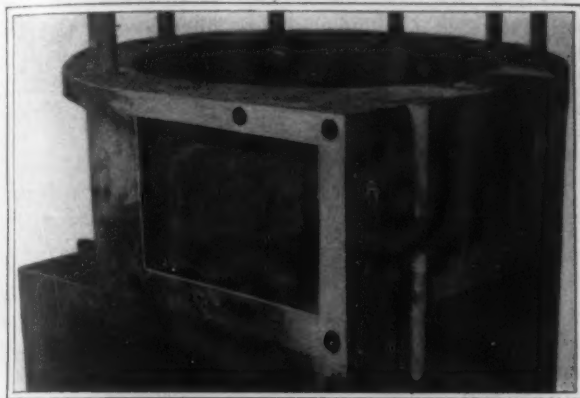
Cylinder Head Repaired by Welding in a New Piece.
